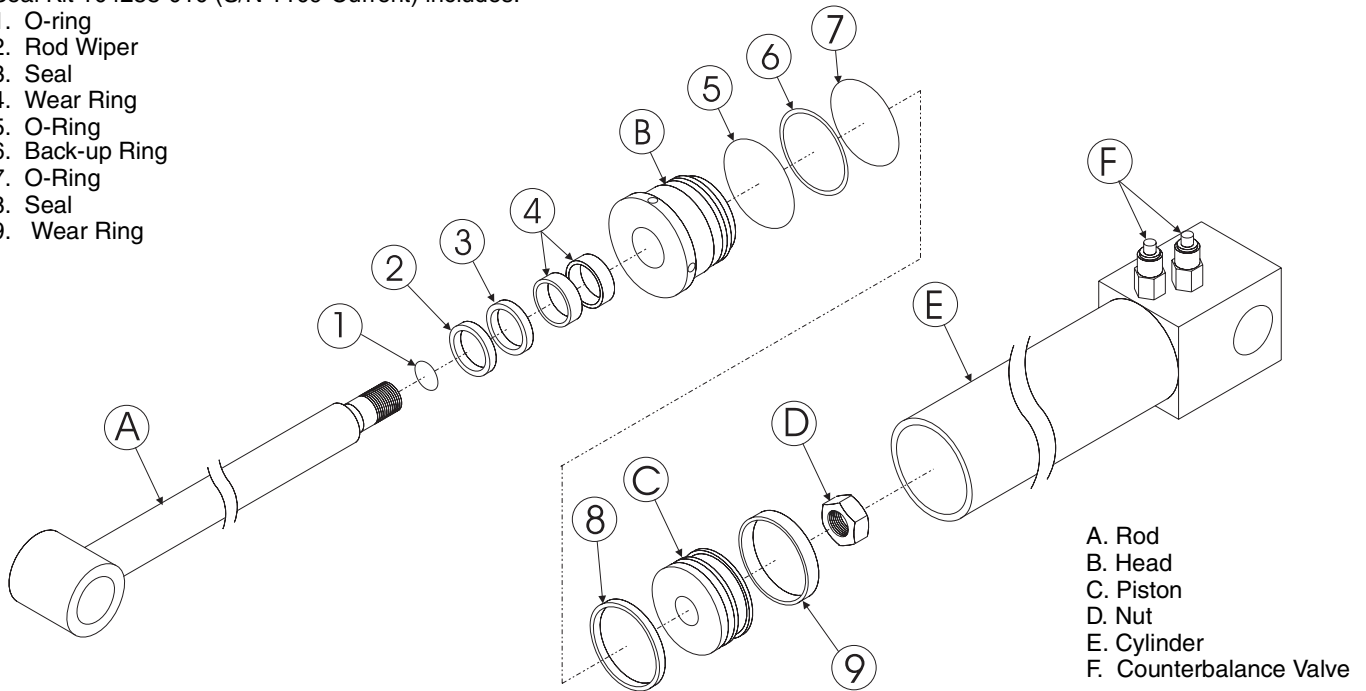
Master Cylinder (S/N 1109 - Current)
